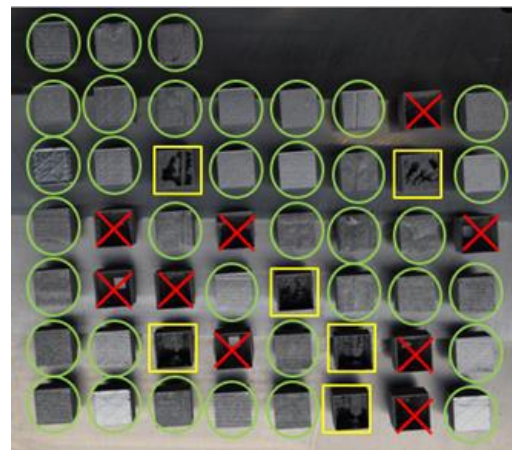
Build Photo: DoE 1 (green parts built completely, yellow parts incomplete build, red parts failed to build at all)
